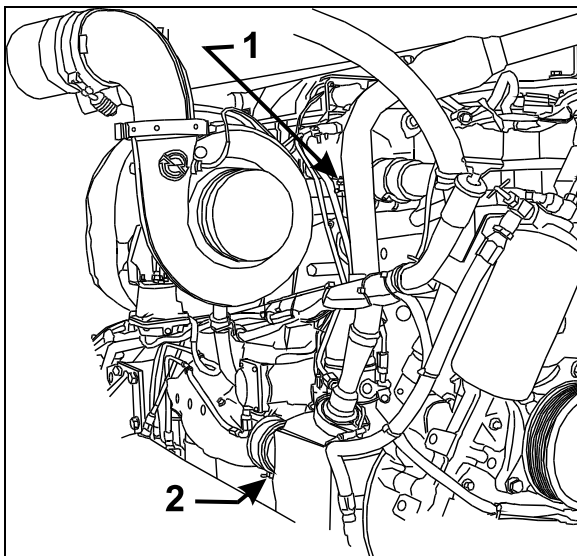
ENGINE COOLANT DRAIN COCKS 05088
